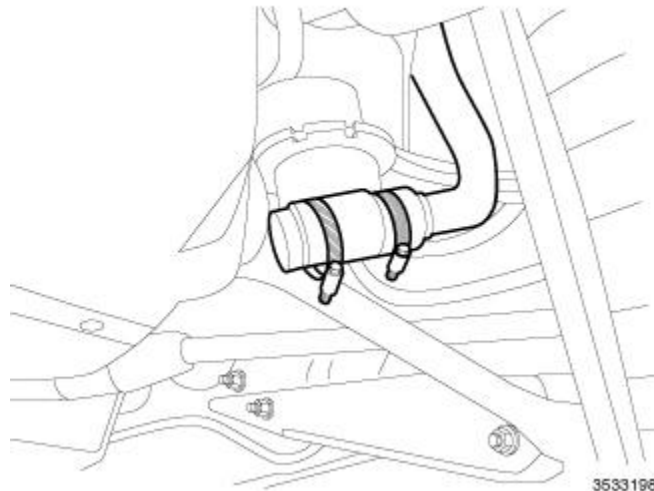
Remove/Install Fuel Filler Tube Rubber Hose
